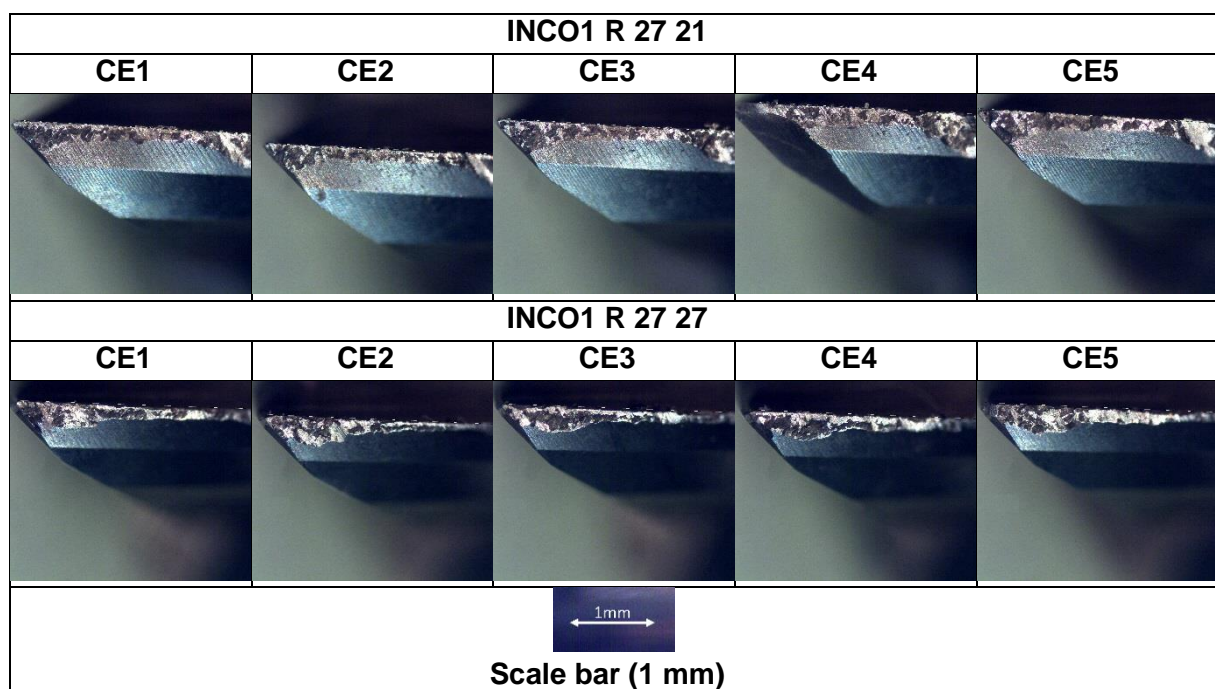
Excessive cutting tool wear due to abrasive wear in end-milling of Inconel 718
